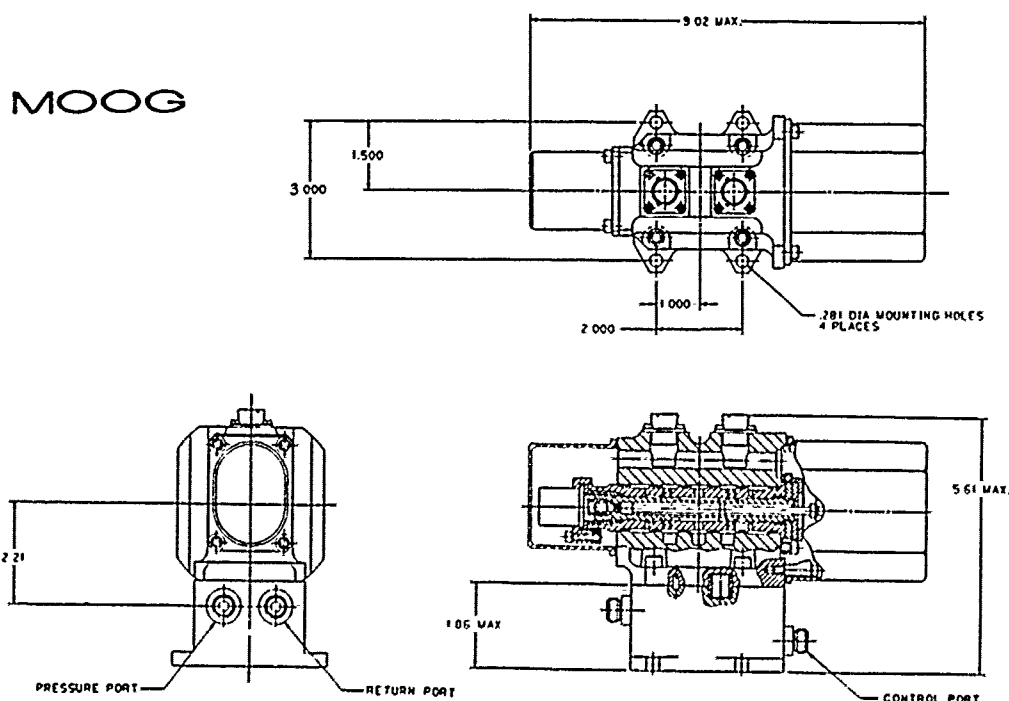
MOOG - Convergent Flap Servovalve Outline/Detail Drawing
